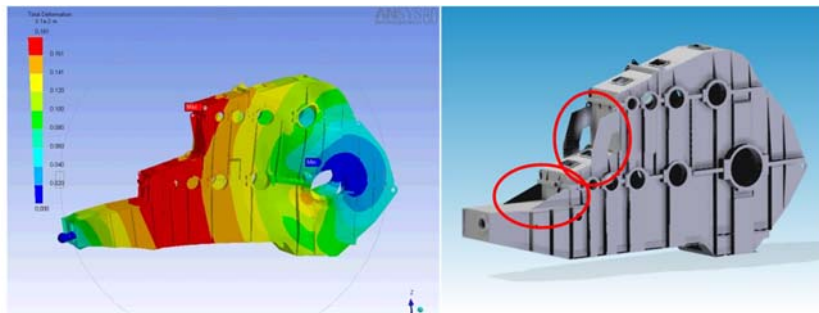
Re-engineering of the gear drive of a bucketwheel excavator
